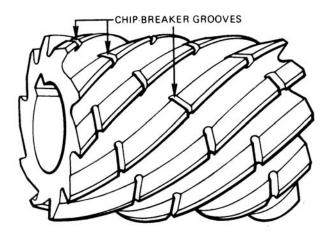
Chip breaking grooves on a plain helical milling cutter.
